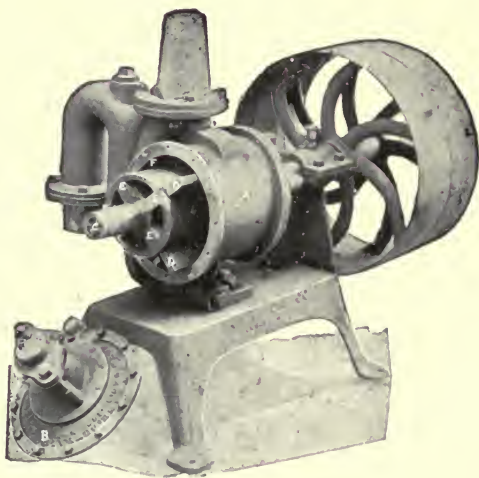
Taber Rotary Pump, showing Working Parts.
